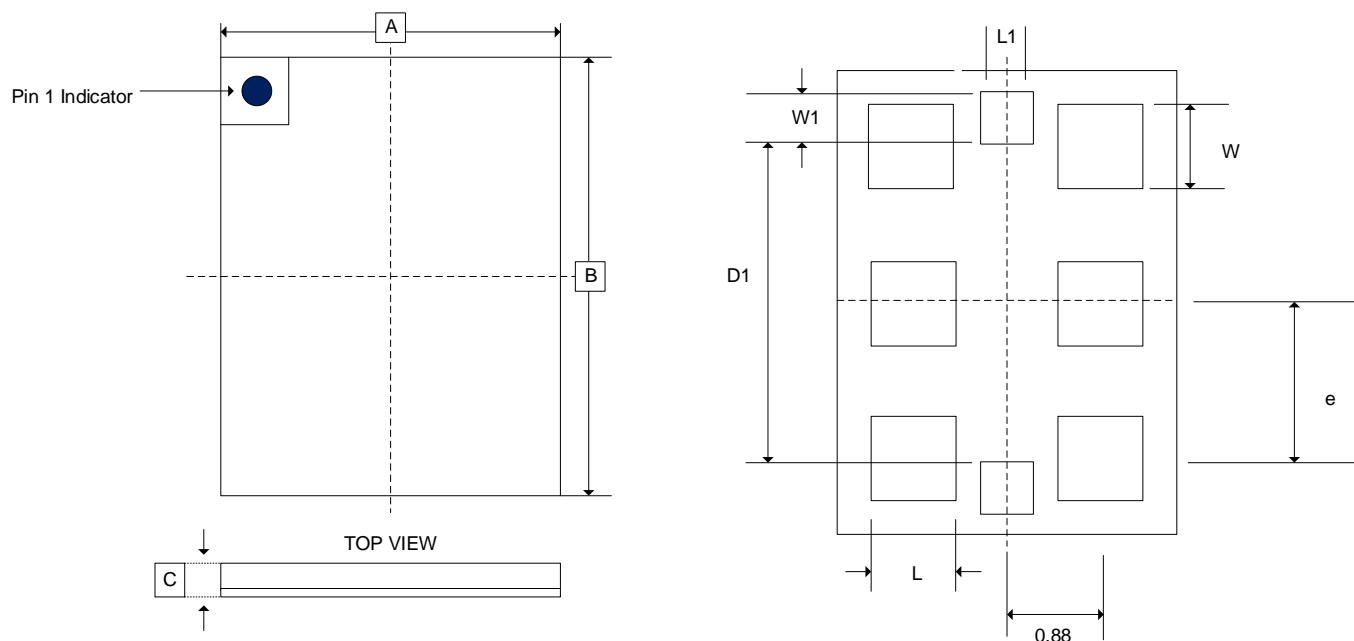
MS1510 Packaging Drawing (3.2mm x 2.5 mm)
